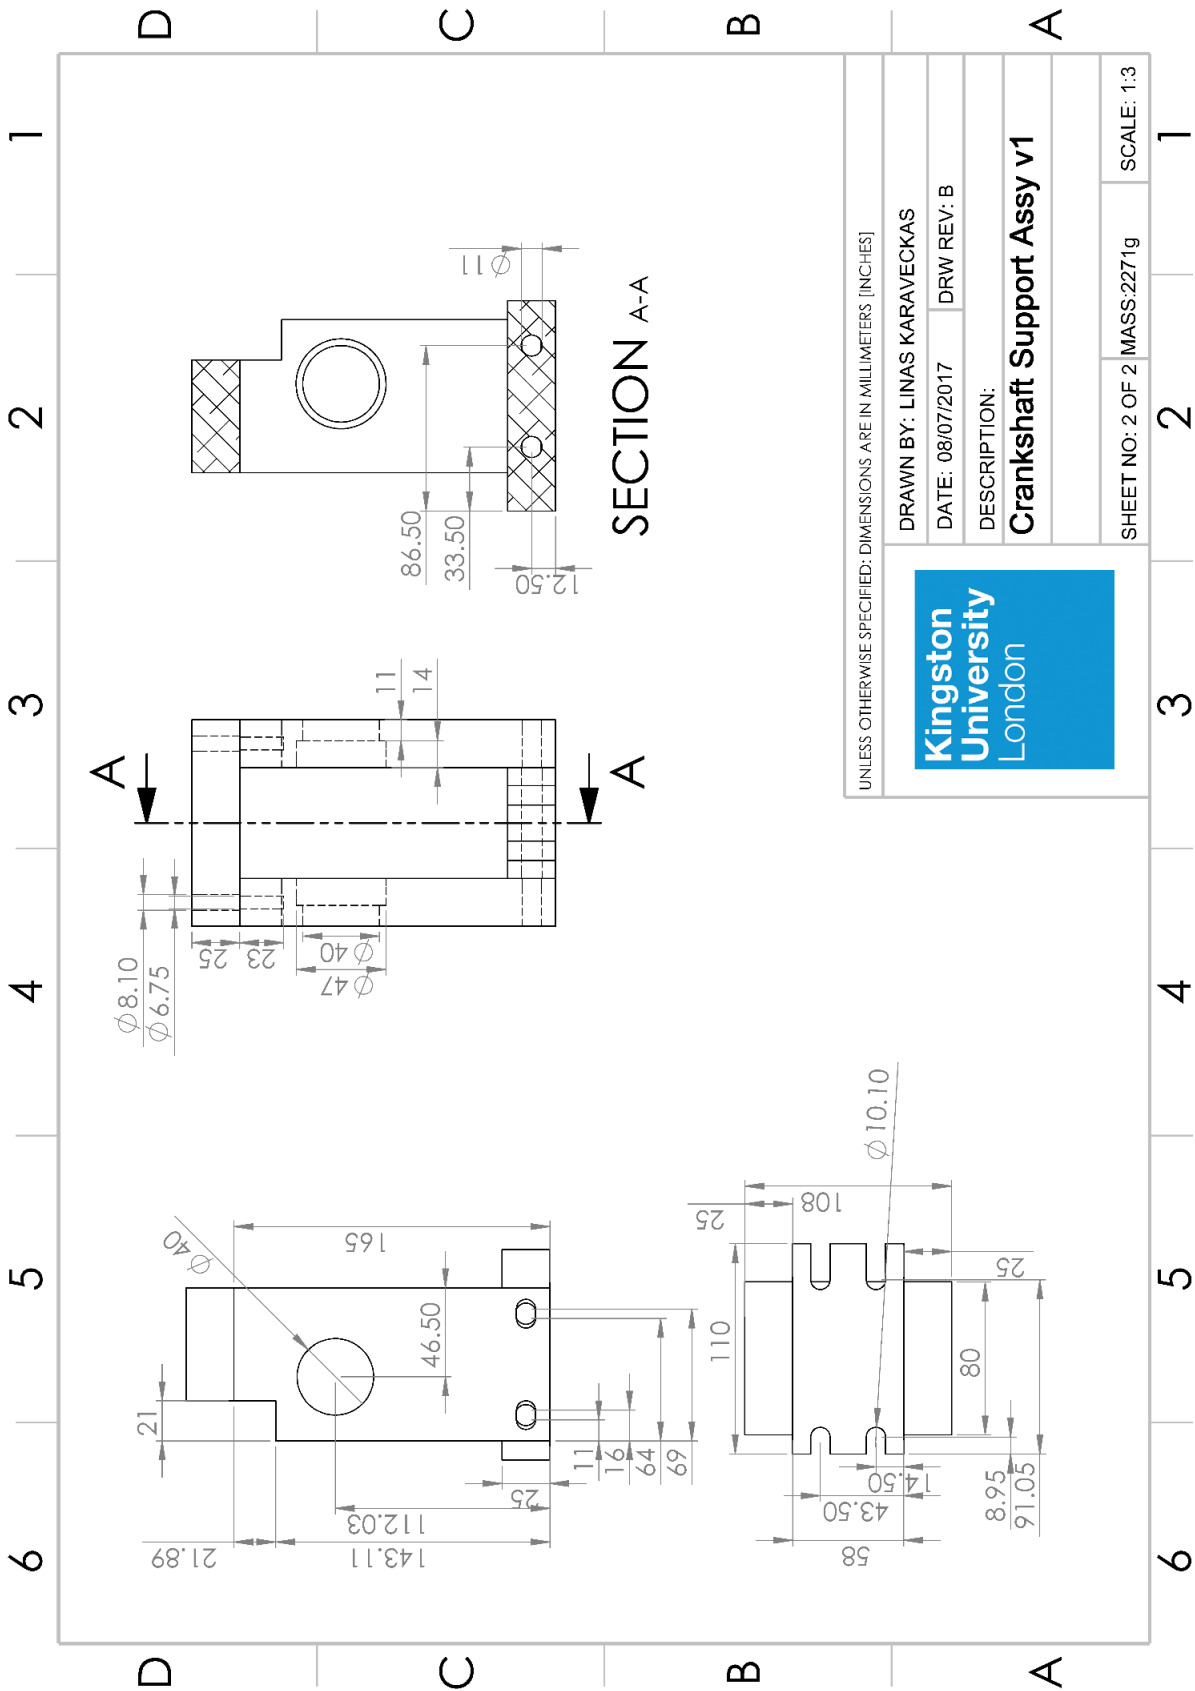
Mark II Crankshaft Support Drawing, Pg.2
